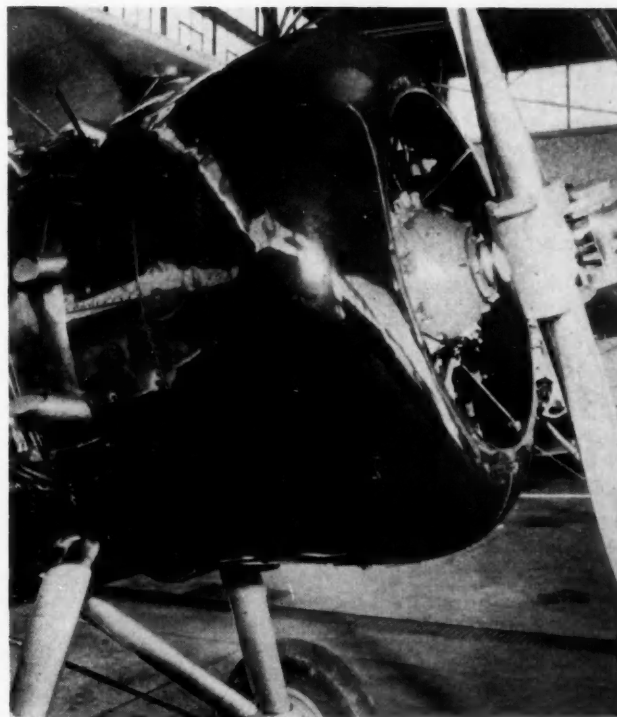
Closed Position of Controllable Cowl-Flaps as Installed on a V-70-A Airplane Equipped with a "Hornet" Engine
